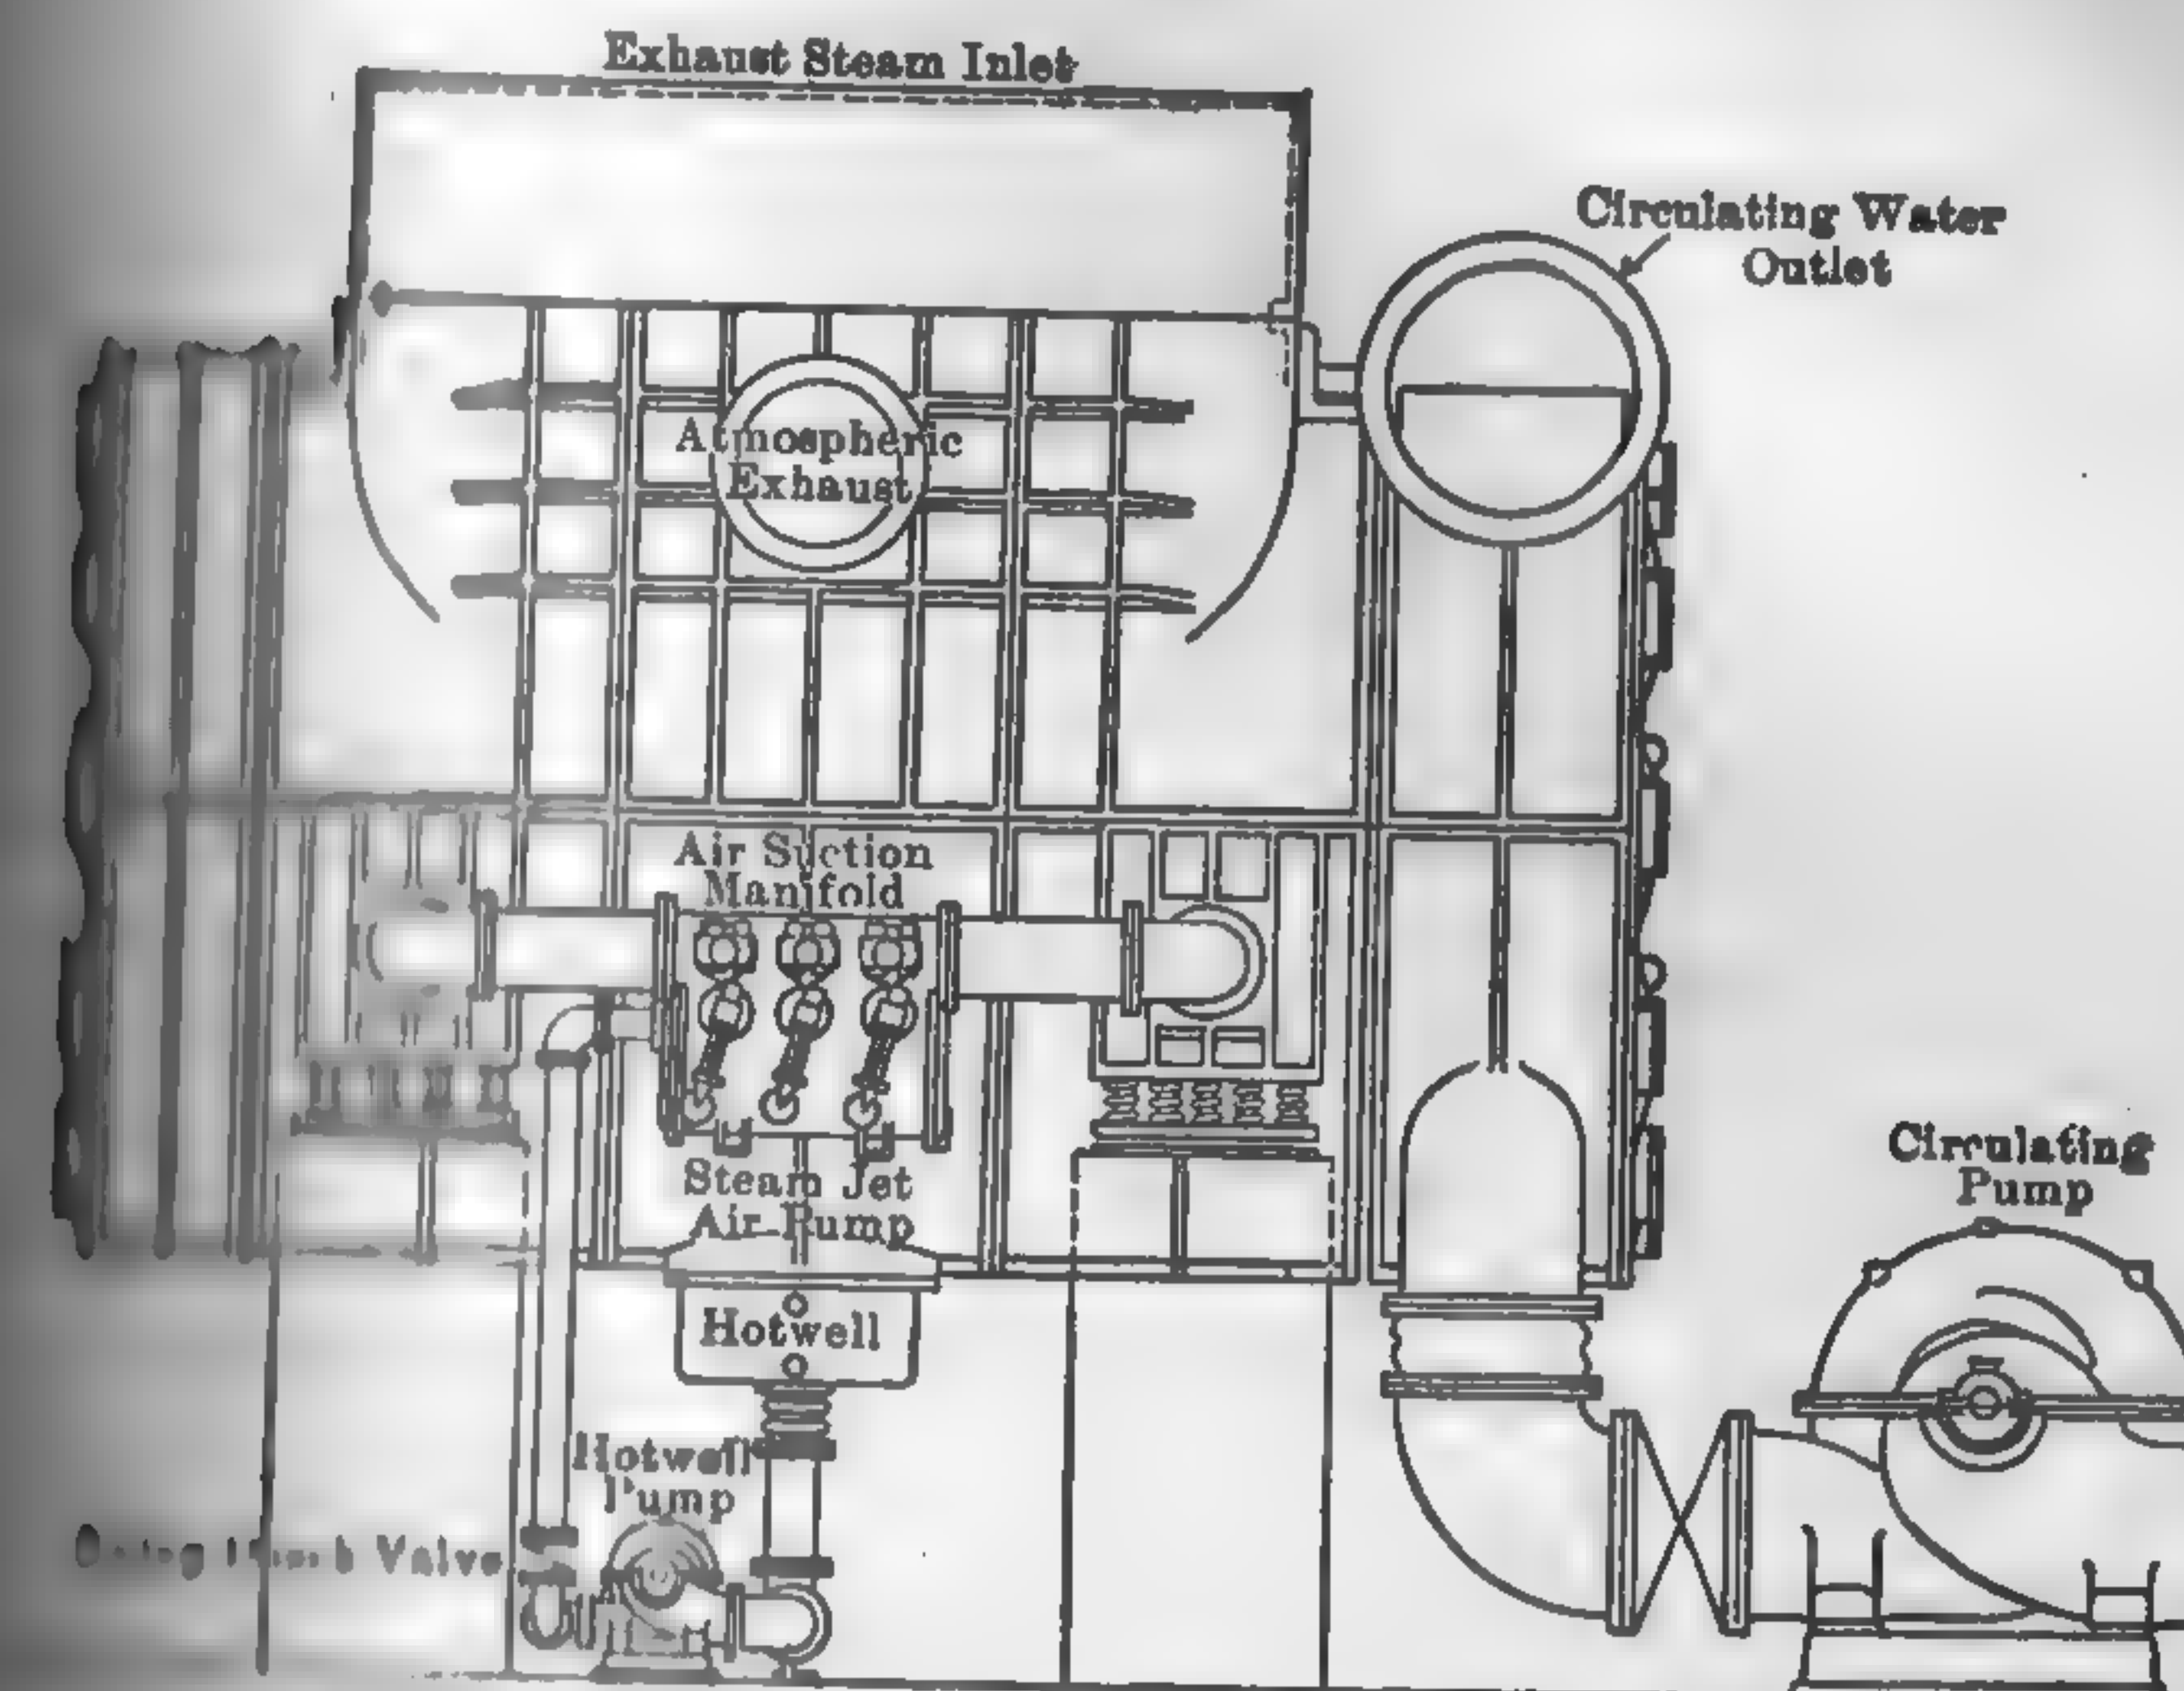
100,000 Sq. Ft. Condenser Layout with Three-element Wheeler Steam Jet Air Pump.
